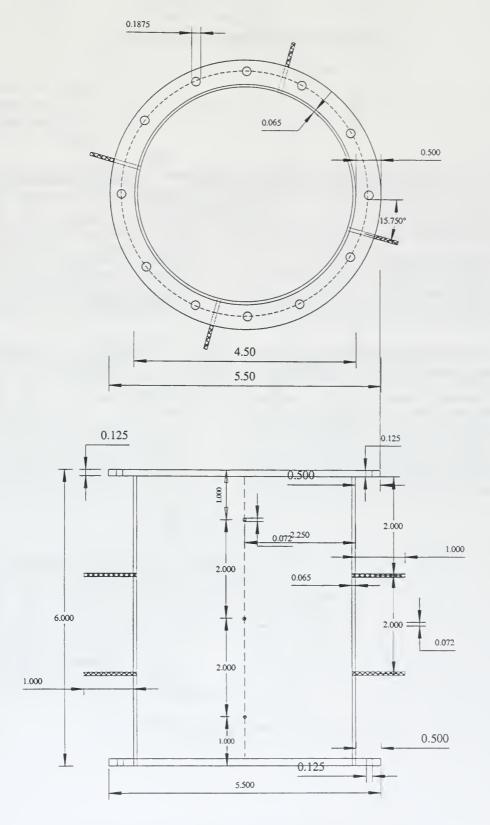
Shroud (Section 4 & 5) Mixer and Combustor
